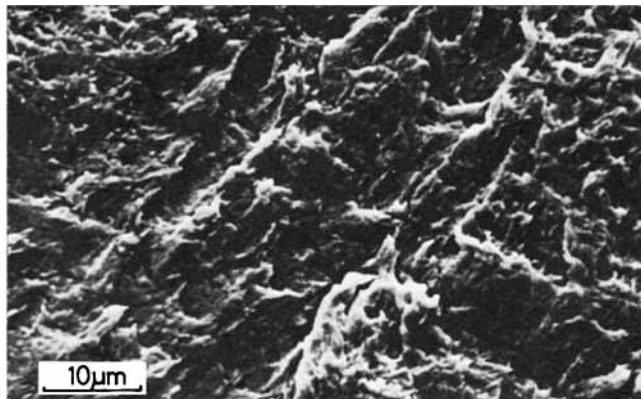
High magnification SEI of another part of the fracture surface of the specimen shown in Figure 15, showing the appearance at a more advanced stage of cracking.
